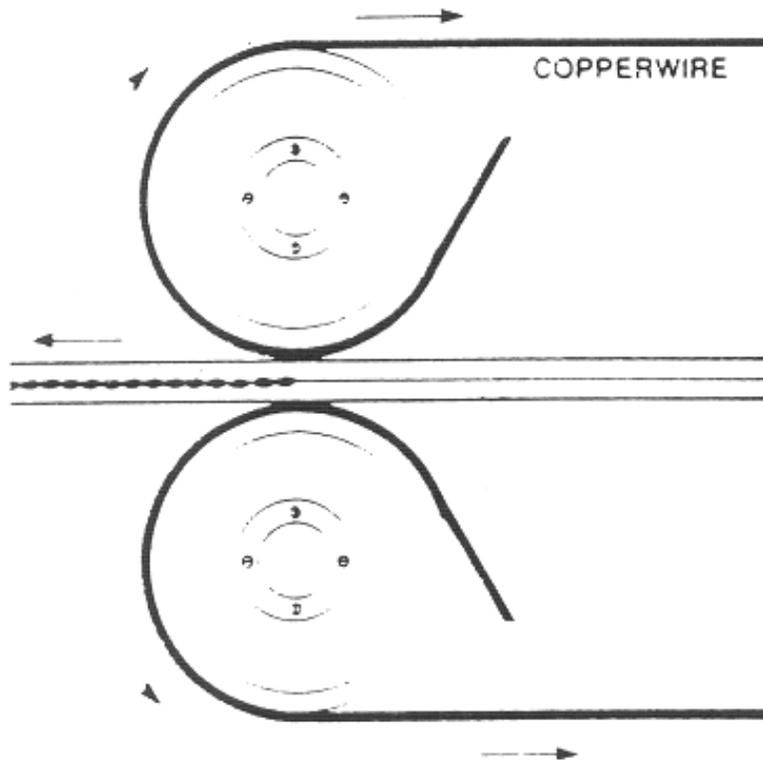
An Improved Seam Welding for Coated Steel
